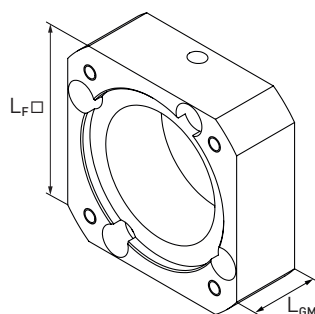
Motor gear adapter plate GM for linear modules HM-B, linear tables HT-B and cantilever axes HC
